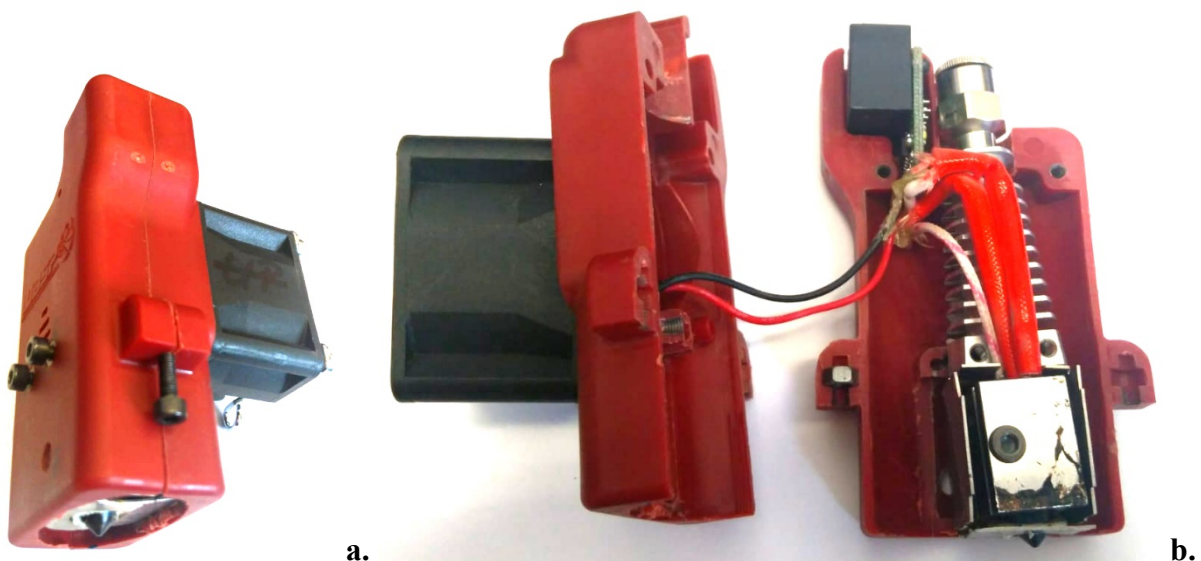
Dispensing head of the polymeric strings (a – encapsulated, b - opened).
